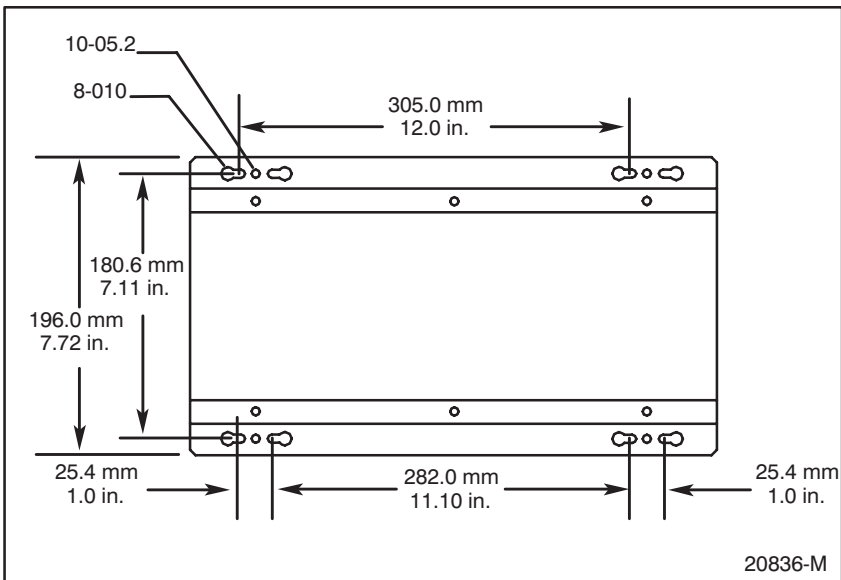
Mounting Dimensions for the AutoMax PC3000 Packaged Version
